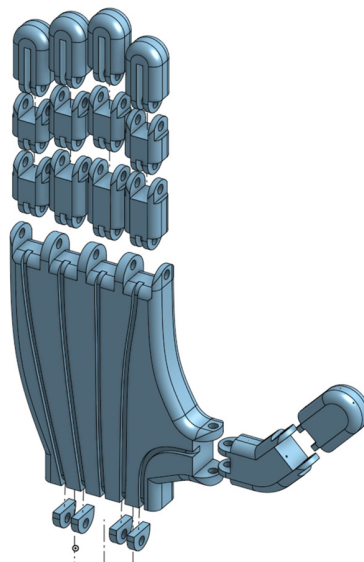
Exploded, dorsal view of transradial prosthesis prototype (hand)
